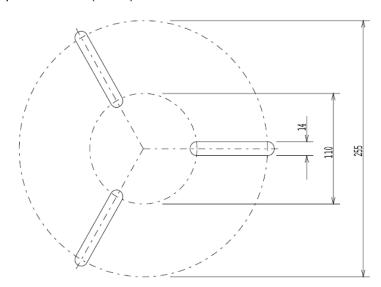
Drilling plan for surge arrester base mounting (66 kV, 88kV and 132 kV arresters)
